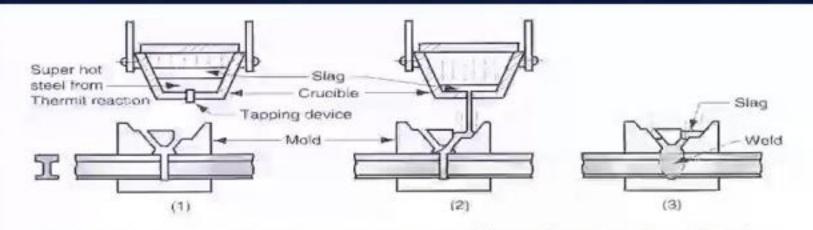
,25 Harmit welding: (1) thermit ignited; (2) crucible topped, superheated metal flows into mola; and (3) metal solidifies to produce weld joint.
